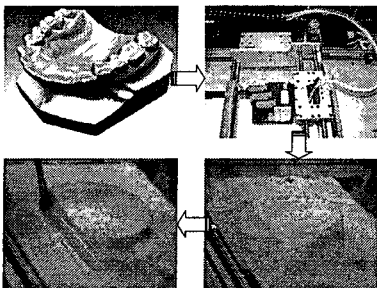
The fabrication process of the 4<sup>th</sup> specimen
